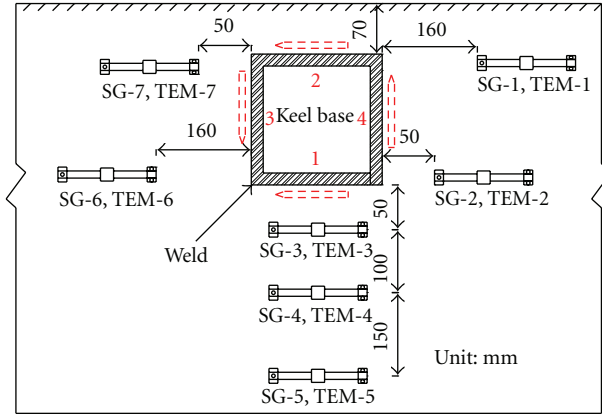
Deployment locations of strain gauges and welding process.
